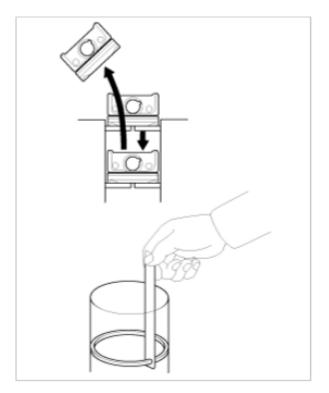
Measuring Piston Ring End Gap Using Feeler Gauge Courtesy of HYUNDAI MOTOR AMERICA
